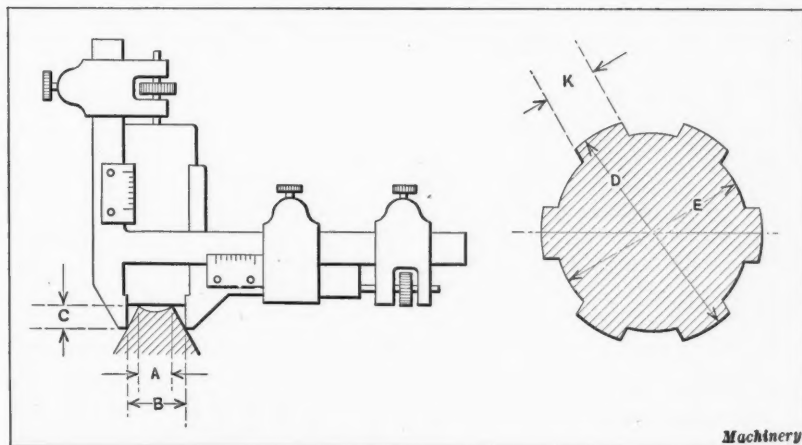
Dimensions which should be furnished on Drawings of Spline Milling Cutter, and Part to be milled
